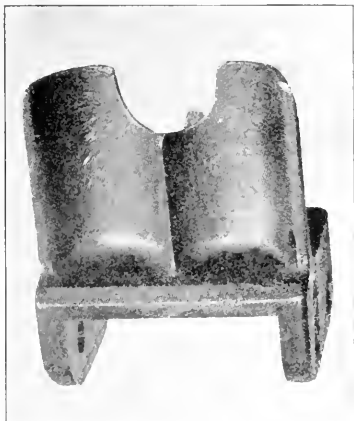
Photo K. A Bucket From One of the Early Blue Lakes Wheels Showing the Impact on the Flat Surface and the Chemical Erosion on the Inside.
